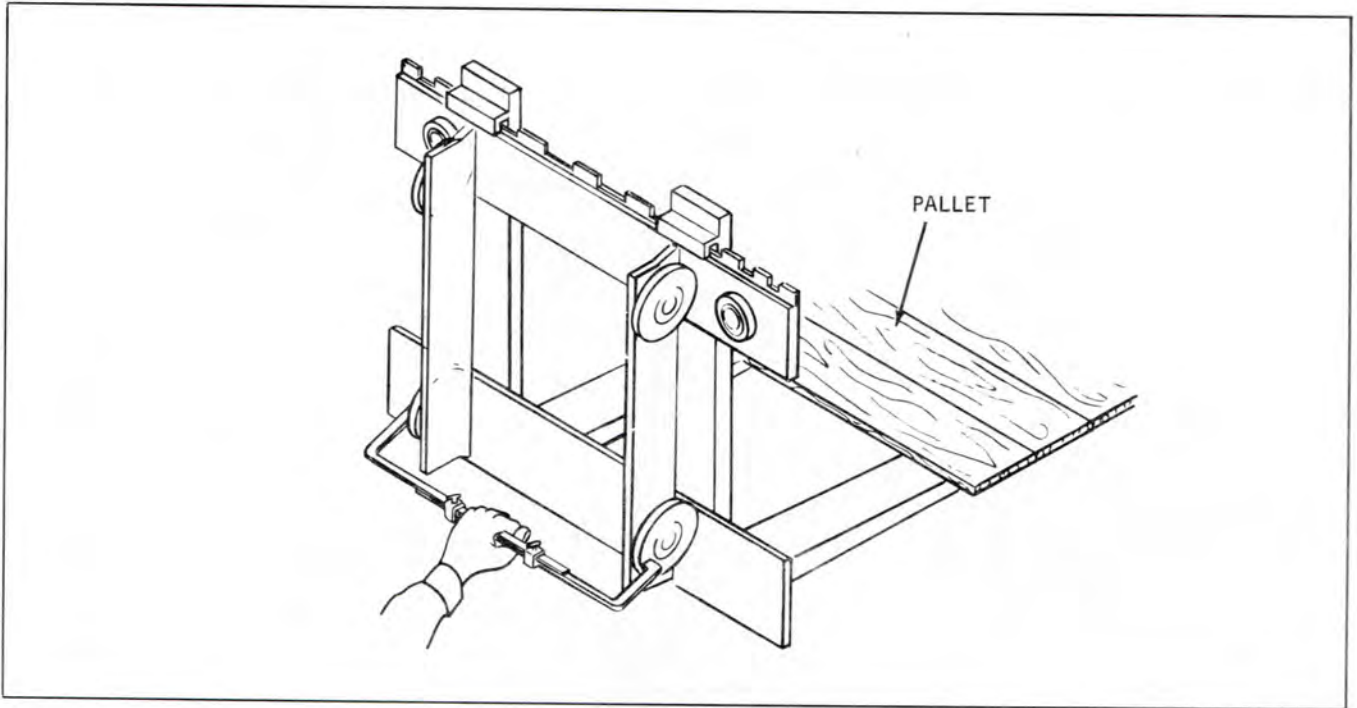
Spanning Lower Rollers (Four Roller Carriage)
